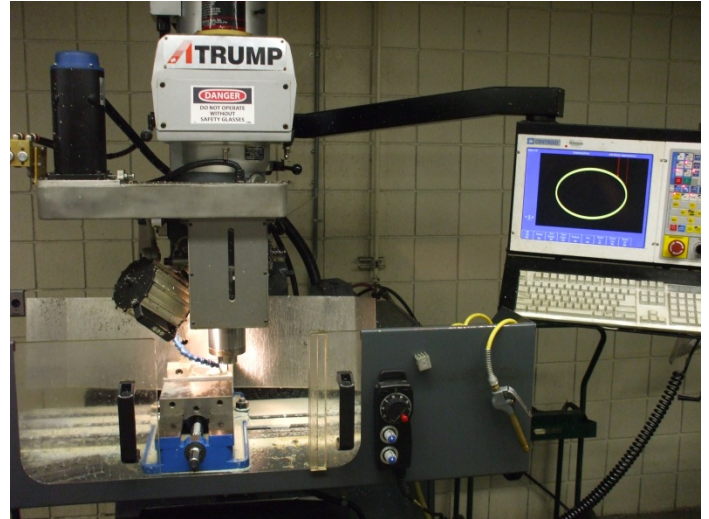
Milling O-ring grooves in end caps for dynamic ballast tank on Trump/Centroid CNC
